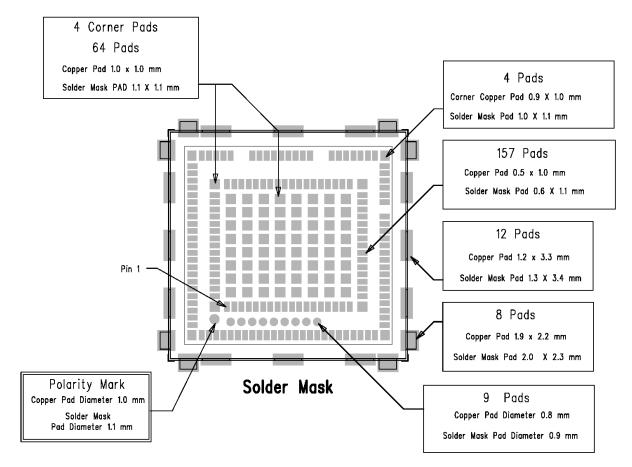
Recommended WP and RC76 Series Snap-in Socket Footprint - Solder Mask Layout
